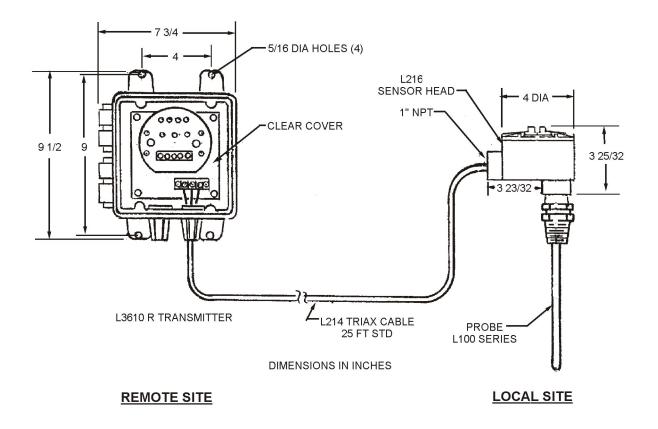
L3610R Dimensional Drawing (Remote Unit)
